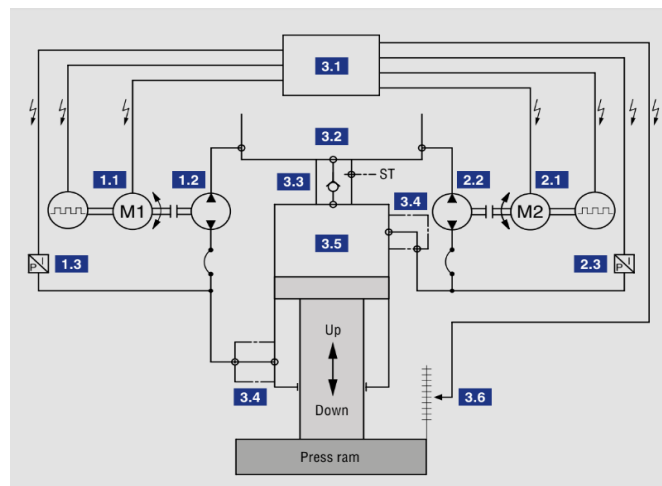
Schematic diagram of the VOITH PSH: 1.1 and 2.1-Servo motor; 1.2 and 2.2-Internal gear reversible crescent pump; 1.3 and 2.3-Pressure sensor; 3.1-Electronic control system; 3.2-Oil reservoir; 3.3-Inlet valve with ST control cable; 3.4-Pressure safety control; 3.5-Operating cylinder; 3.6-Position sensor
